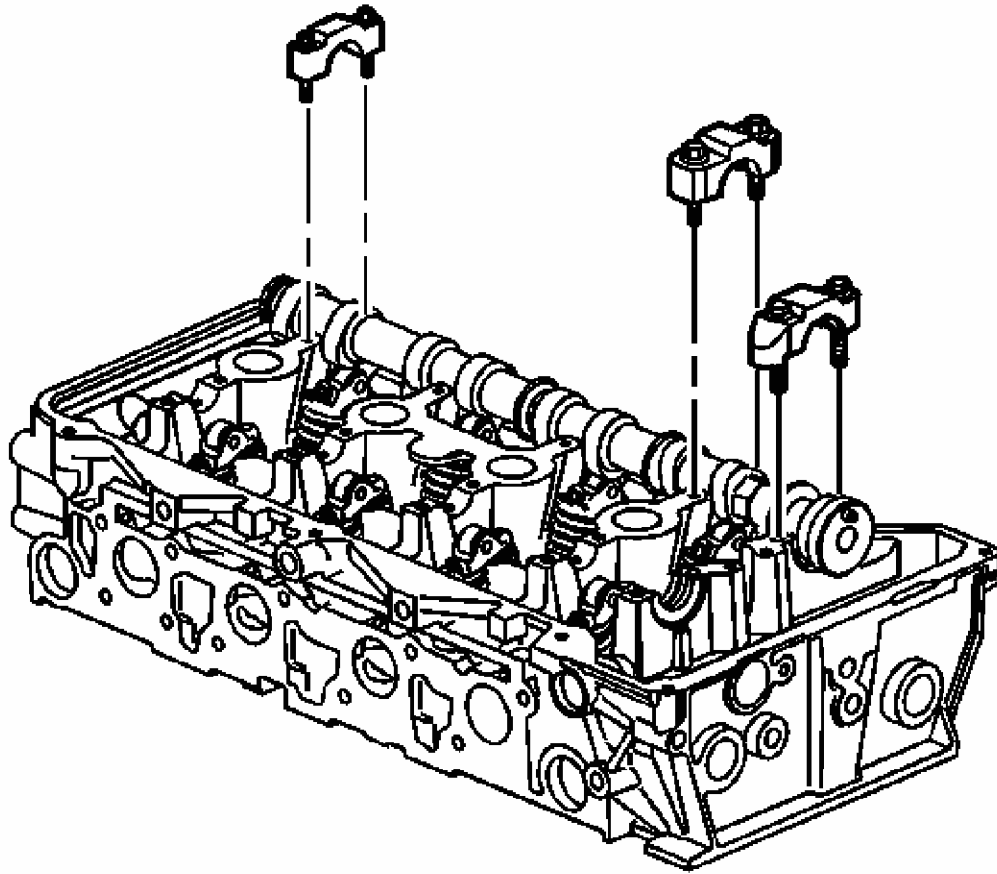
View Of Right Intake Camshaft Bearing Caps & Bolts
